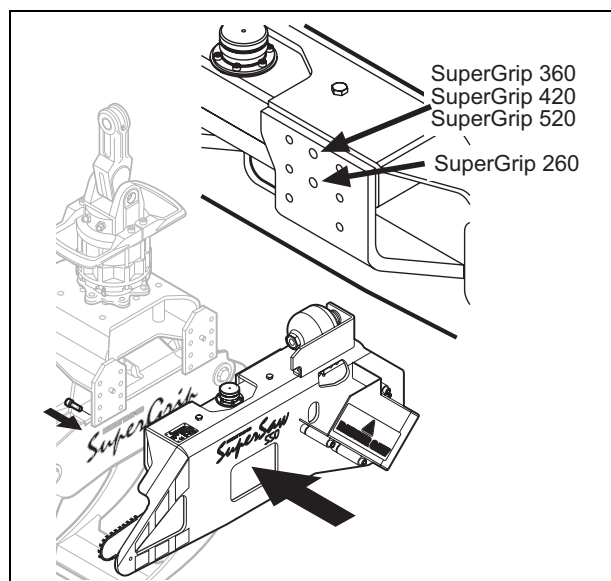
Assemble the SuperSaw 550 to the rotator bracket
